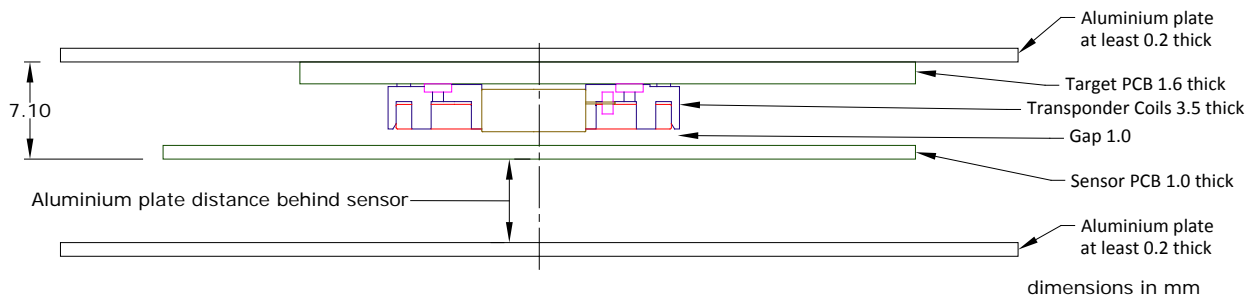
Between Aluminium Plates, Target Mounted to Aluminium
